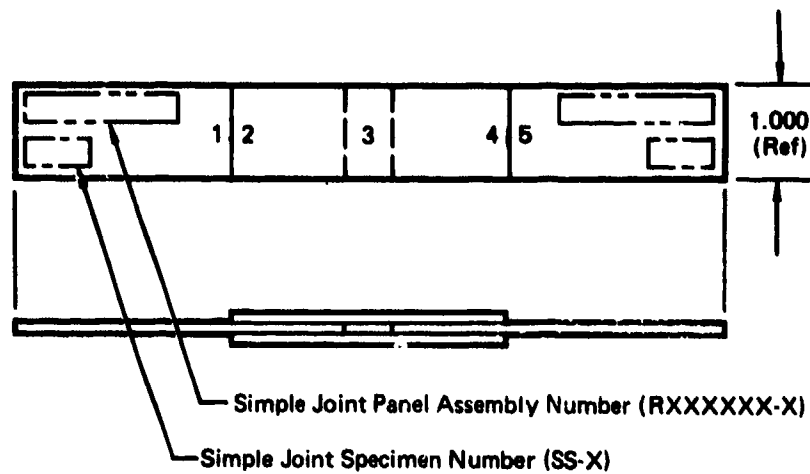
PANEL ASSEMBLY SHOWING LAY-UP CONFIGURATION DETAILS
